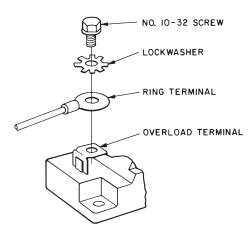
Torque Terminal Screws to 20 Lb-in (2.3 N-m) Maximum
